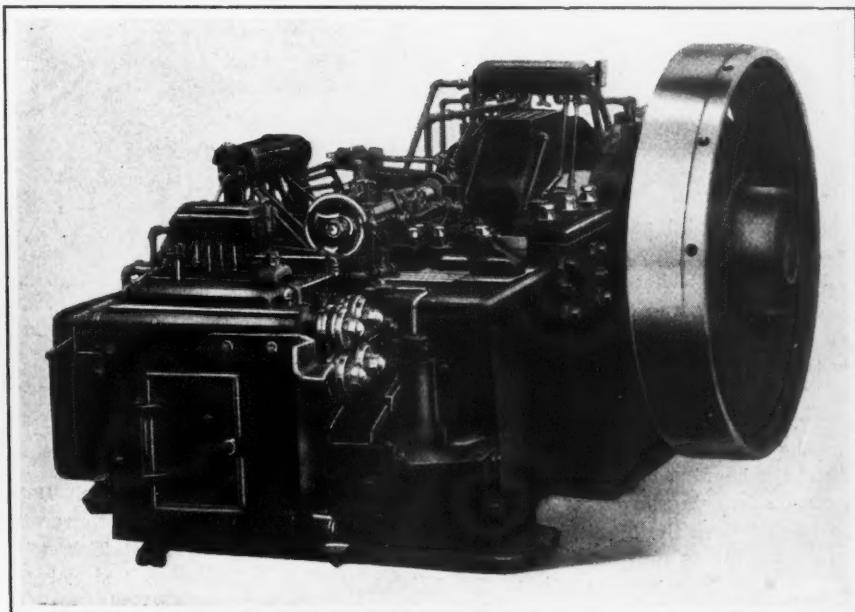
Automatic Semi-hot Bolt and Rivet Header built by the National Machinery Co.
